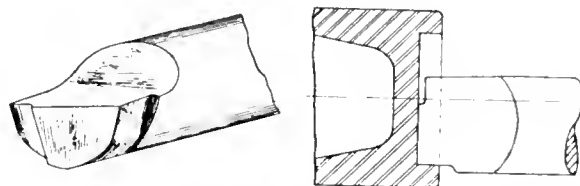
SIMPLE TYPE OF TOOL USED IN RECESSING BASE FOR PLUG.
